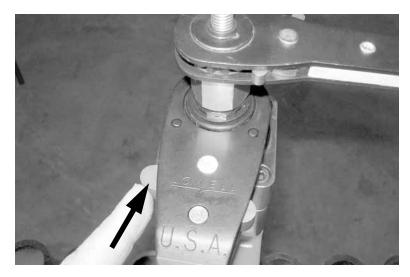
Push the knob on the feed handle to the feed forward direction. The handle will engage clockwise to feed the tool head.
